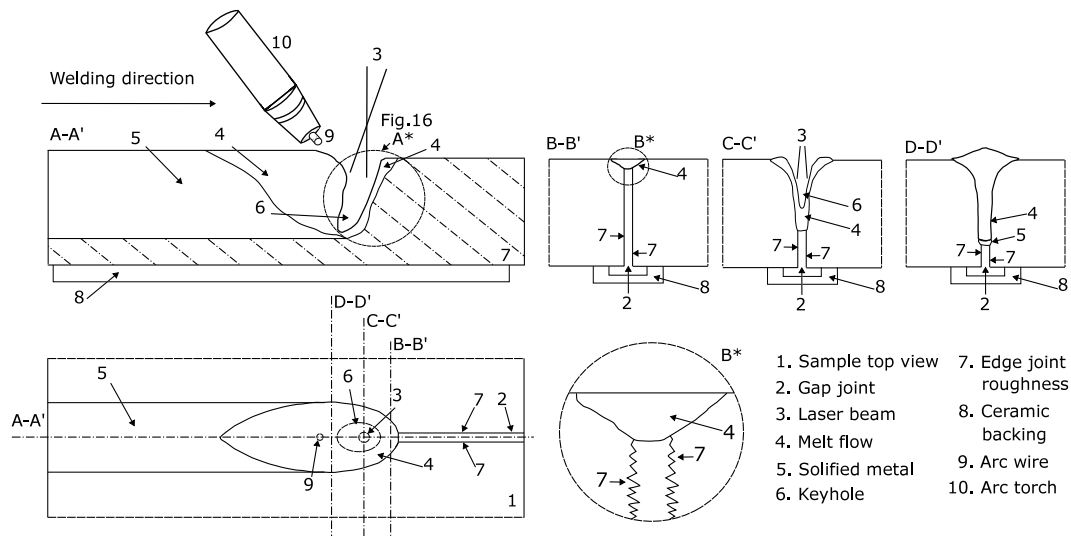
Evolution of the molten pool in LAHW welding. (Note: Non-scale drawing.)
